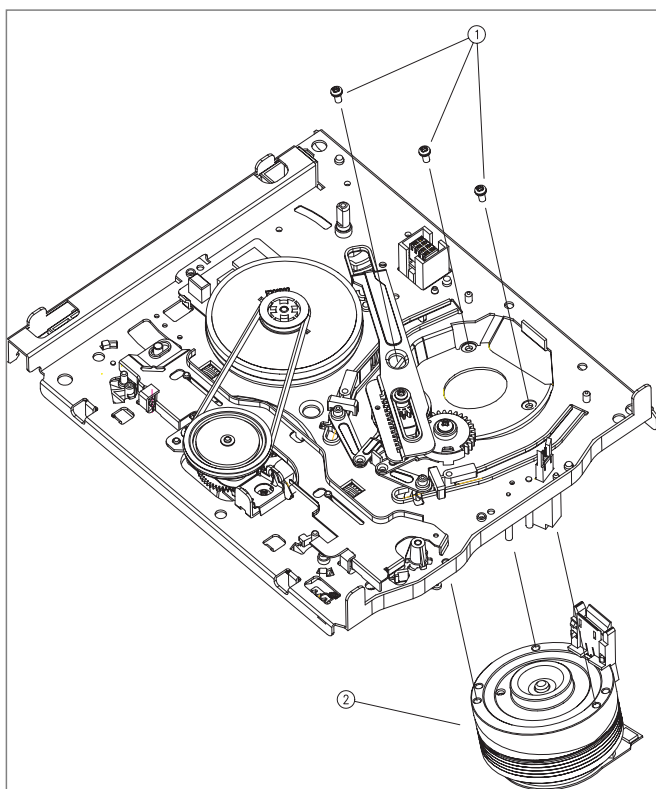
Assembly of the DRUM TOTAL Ass'y
